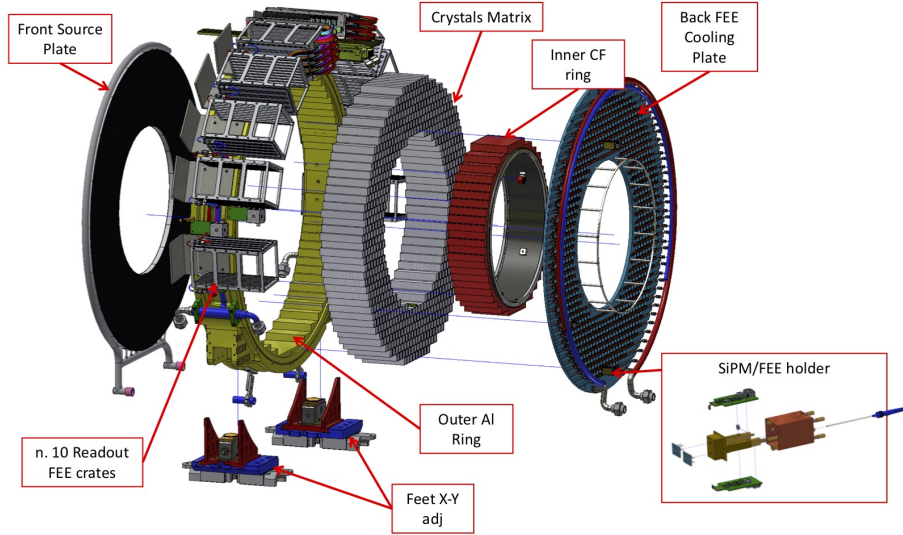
Exploded view of all the mechanical components and view of the two annuli on the detector train.
